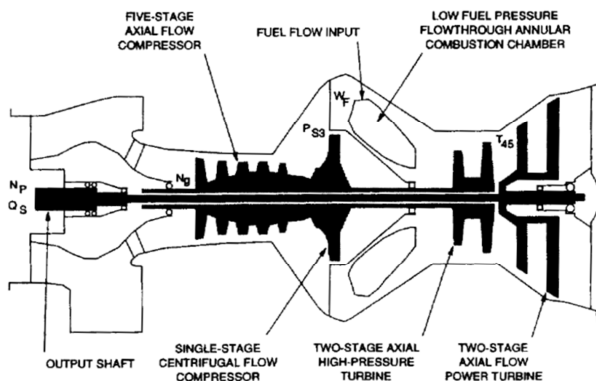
Cross section of a GE T700 turboshaft engine^[18].
